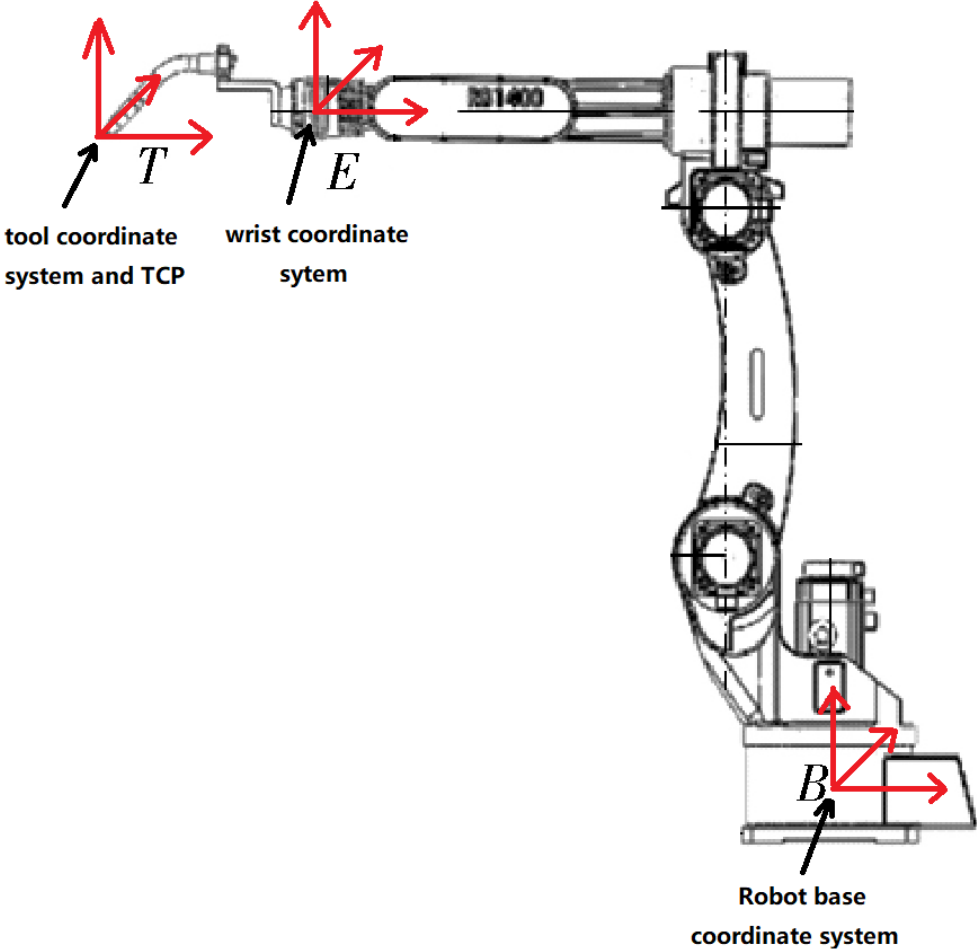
RB_1400 Welding Robot (Hao Gu, 2015)
